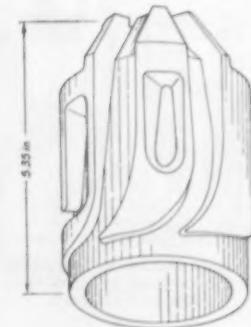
Inner Casing of a Reheat Fuel Pump Made as an Investment Casting Because Dimensional Tolerance of Plus and Minus 0.003 In., As Cast, Could Not Be Met by Permanent Mold Casting
